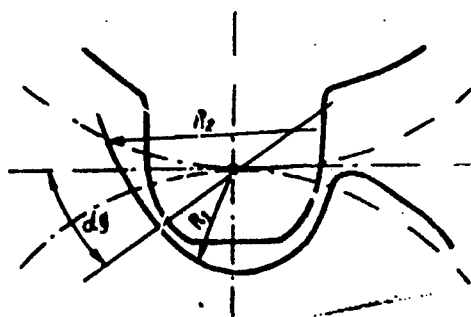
Contact of tooth profiles in a circular-helical engagement.
